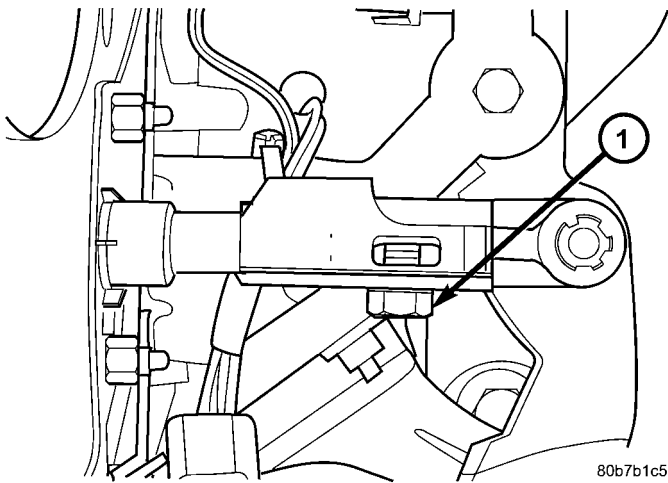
Clutch Master Cylinder Pushrod Adjustment Screw
